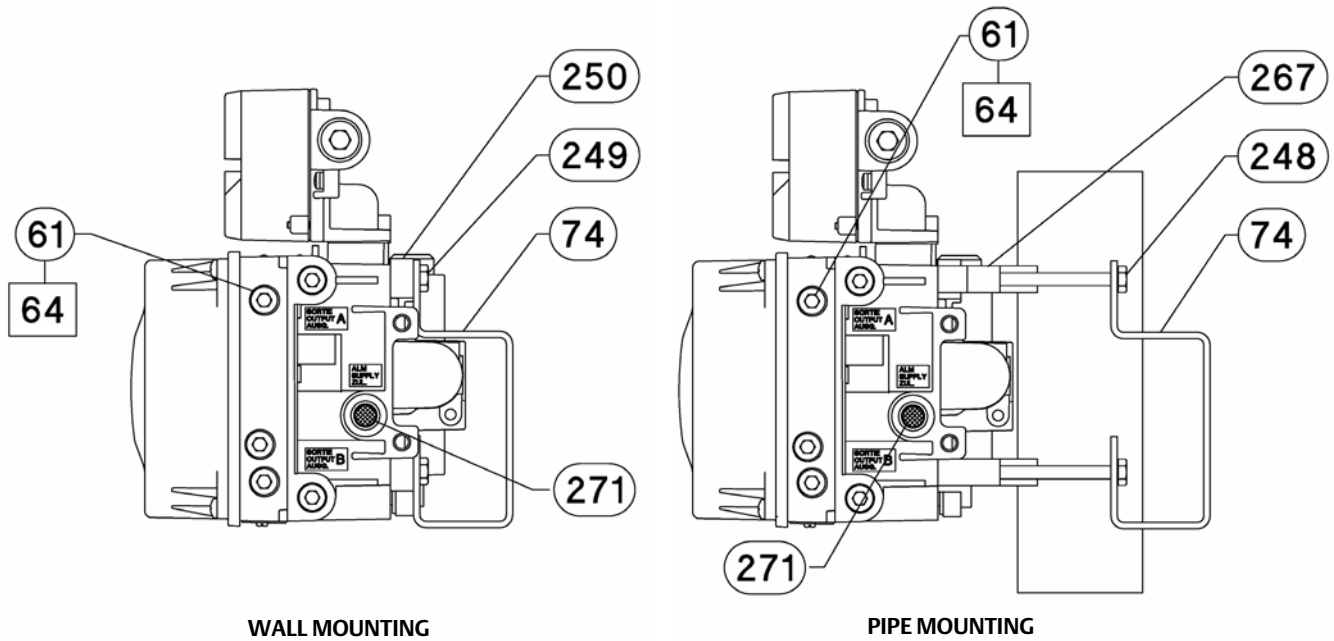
FIELDVUE DVC6205 SIS Base Unit Housing Assembly (continued)
